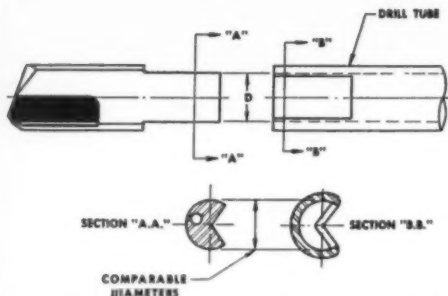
One of the two methods of brazing carbide drill ends to the drill tubes. Note, shank end of drill turned down to fit inside of drill tube.
